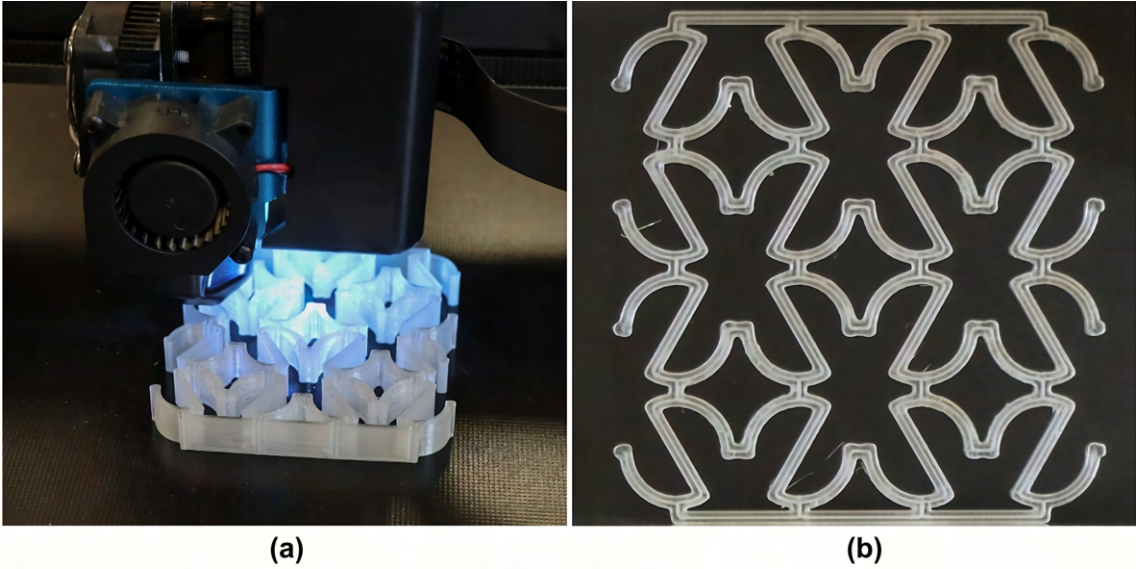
(a) Manufacturing of the samples through the FFF process and (b) 3D printed S-shaped sample.
